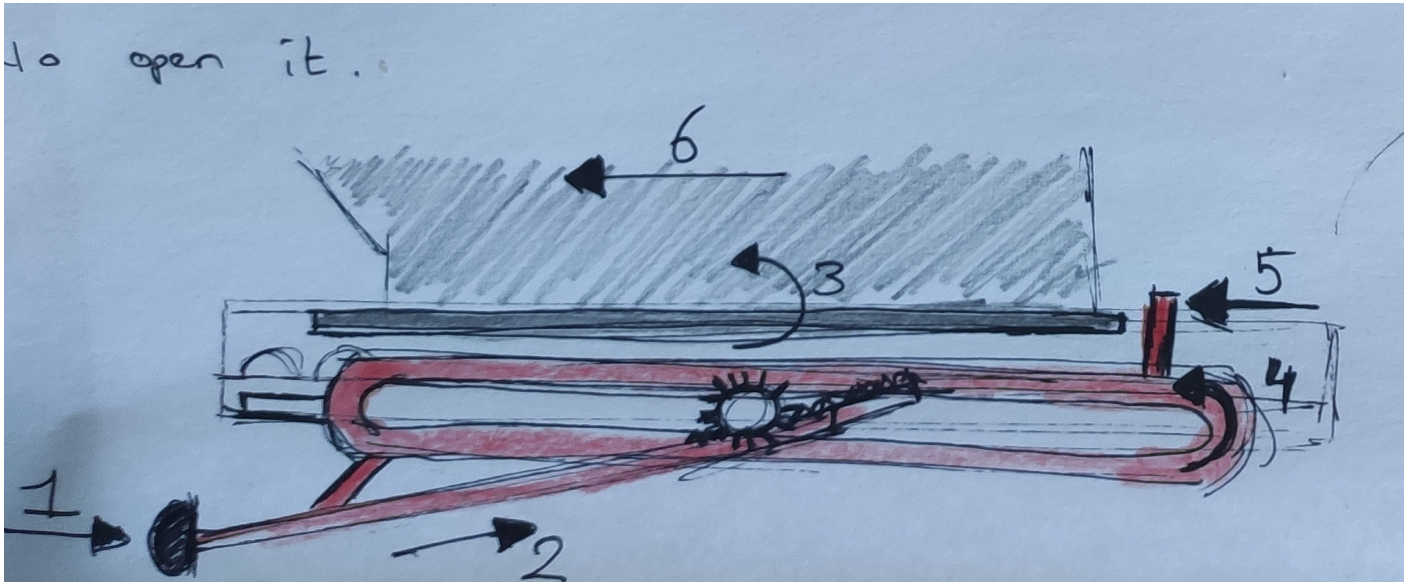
When the transporter drives against the bar far enough the push mechanism starts to move. The rod drive a gear that drives a chain with a pin. That pin pushes against the container.
